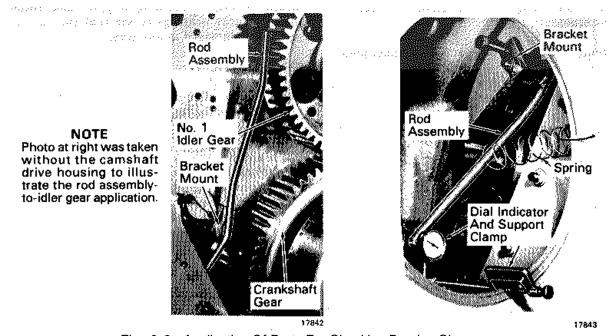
Application Of Parts For Checking Bearing Clearance 55E782 7-4
